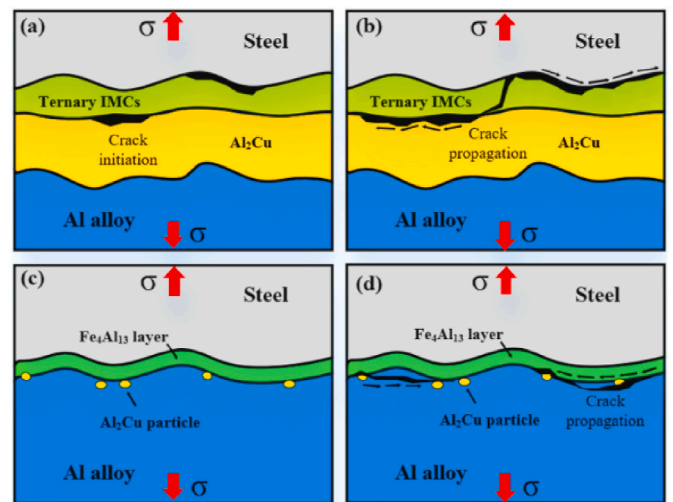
Fracture behavior of the welded joint: (a) and (b) Cu-rich layer; (c) and (d) Fe_4Al_{13} layer [87].
